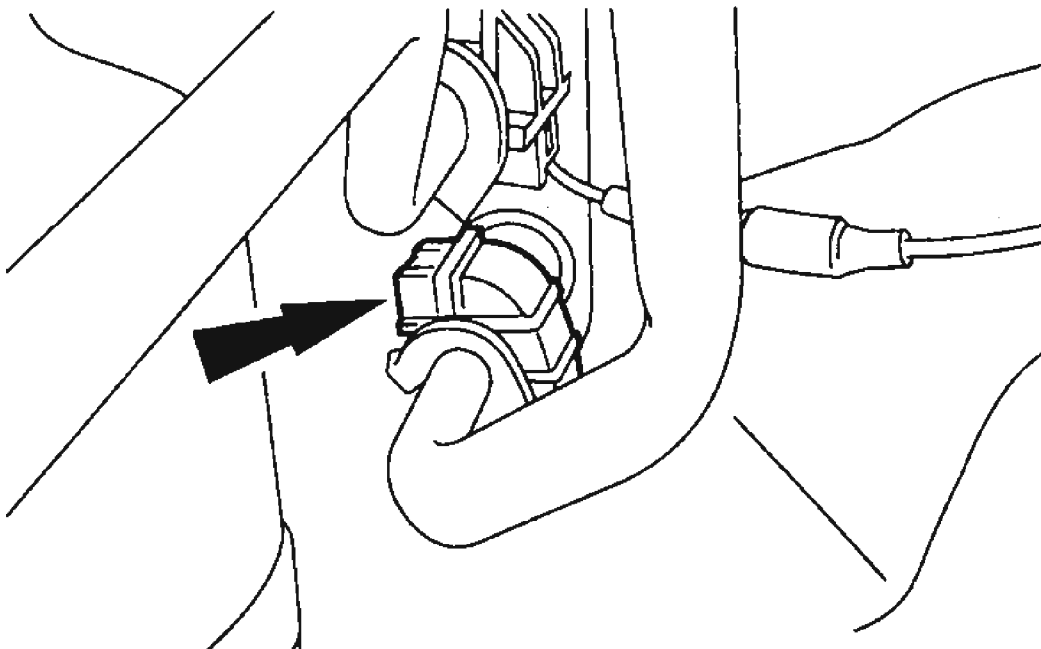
Disconnecting Compressor Manifold & Tube Assembly
